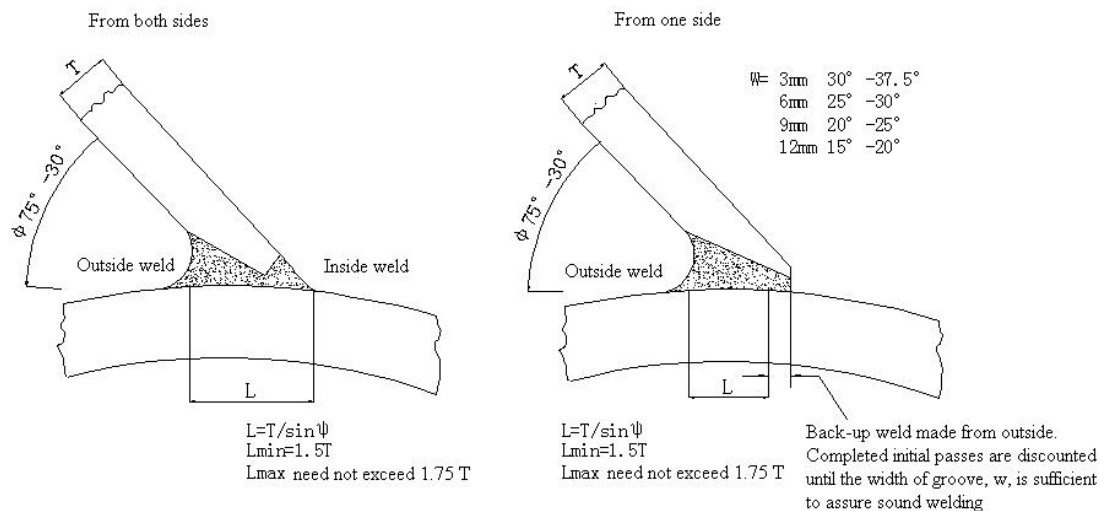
(5) Weld Location 4
